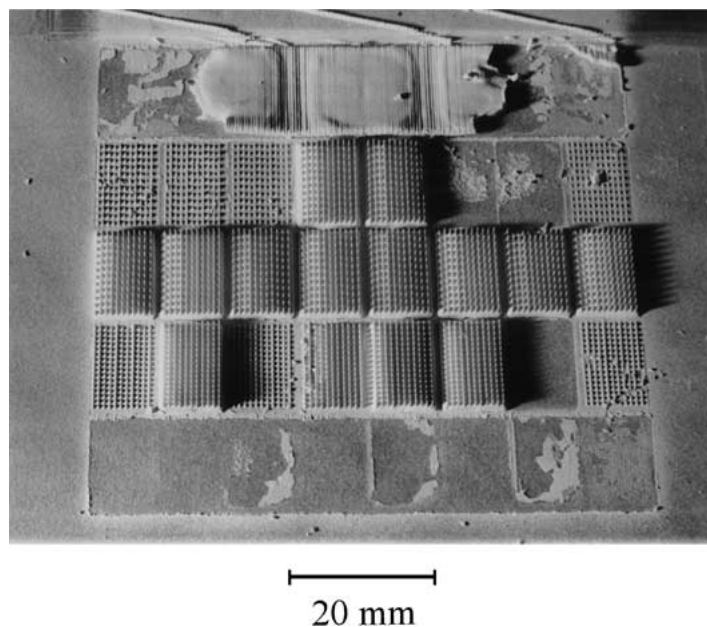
Photograph of the building site showing blocks of pillar arrays; some have been removed for testing.
